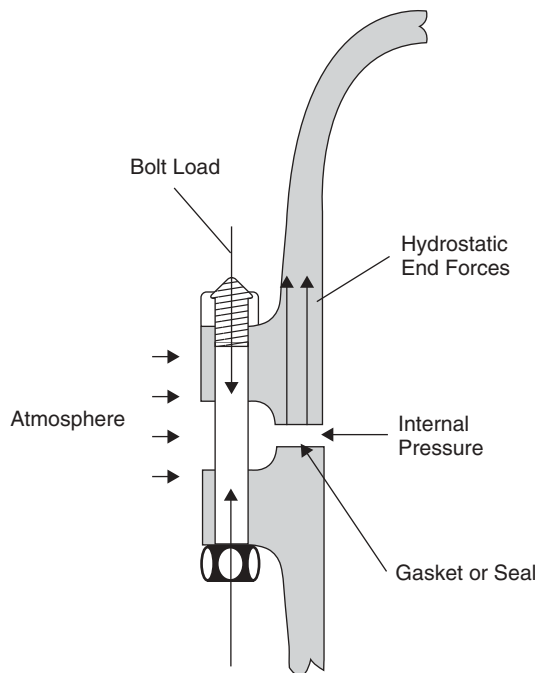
Forces acting on a gasketed flanged joint. (Courtesy of Garlock, an EnPro Industries family of companies.)
